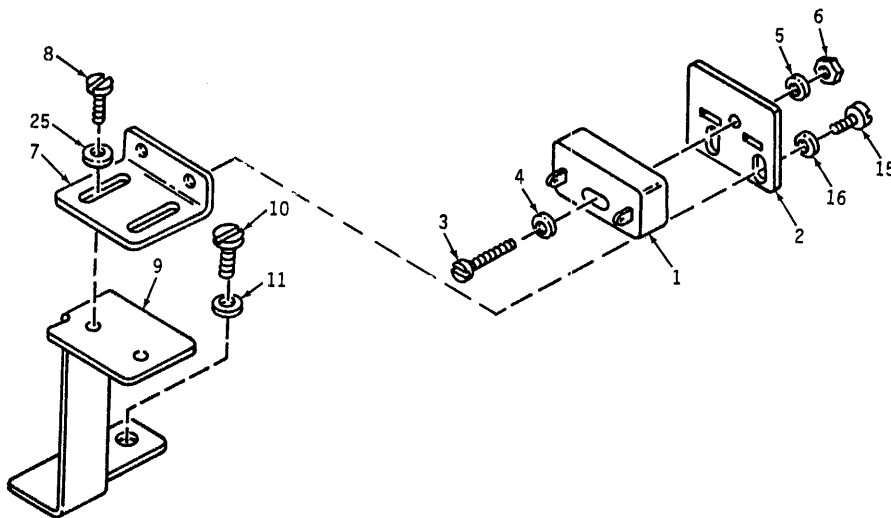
REED SWITCH ASSEMBLY, LEFT (AG)
